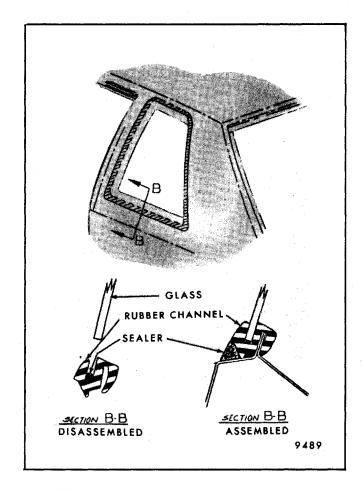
Outside Loaded Rubber Channel Sealing - C Styles with Vinyl Top Typical
